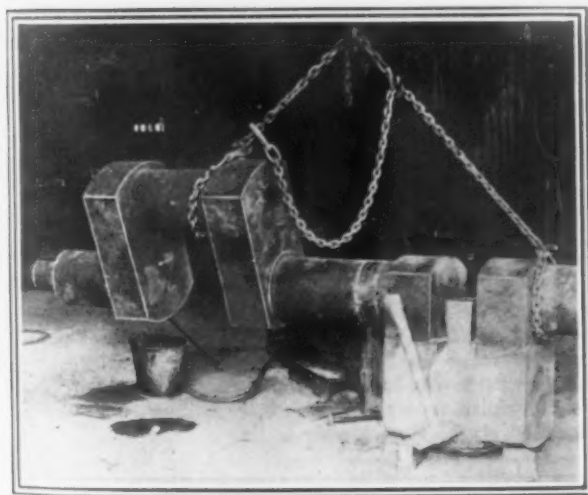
Correct Method of Lining Up Broken Crankshafts. Pin Journal Welded in Lowest Position
